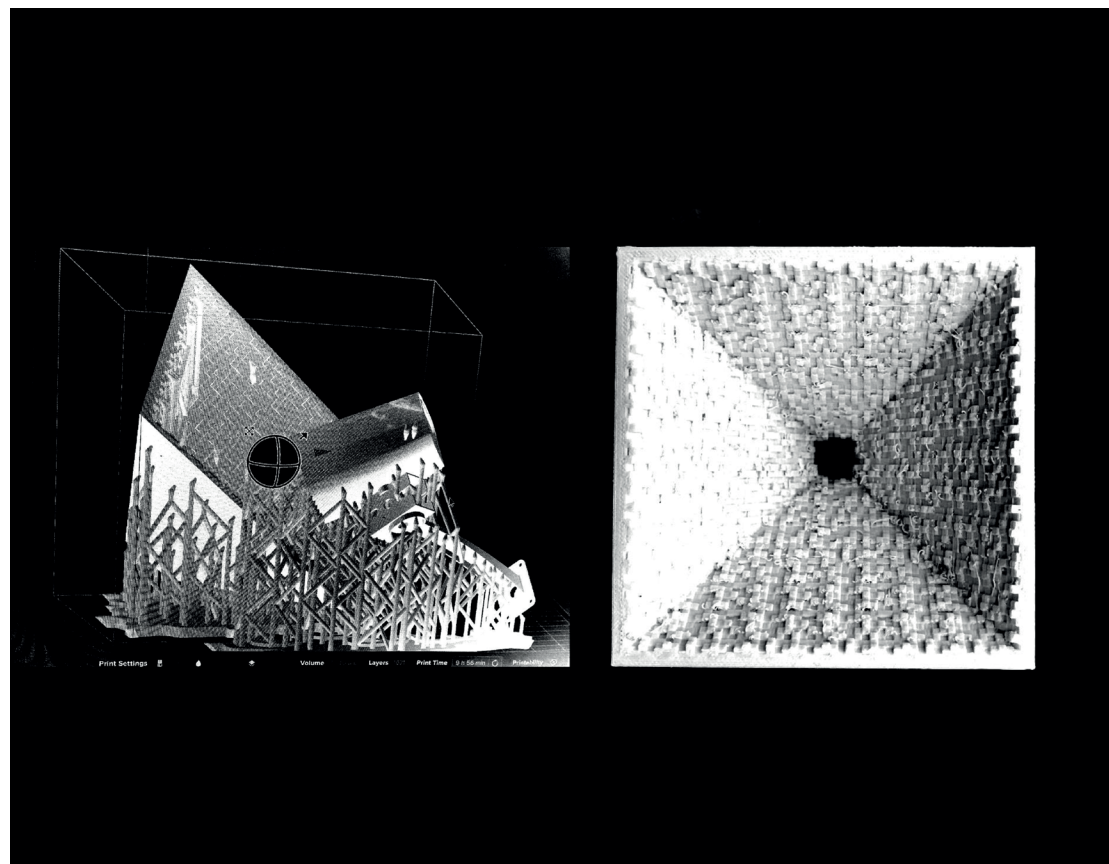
(Top) Initial sketch of the three-dimensional pixelation tool and (Bottom) image showing the printed tool mould.
